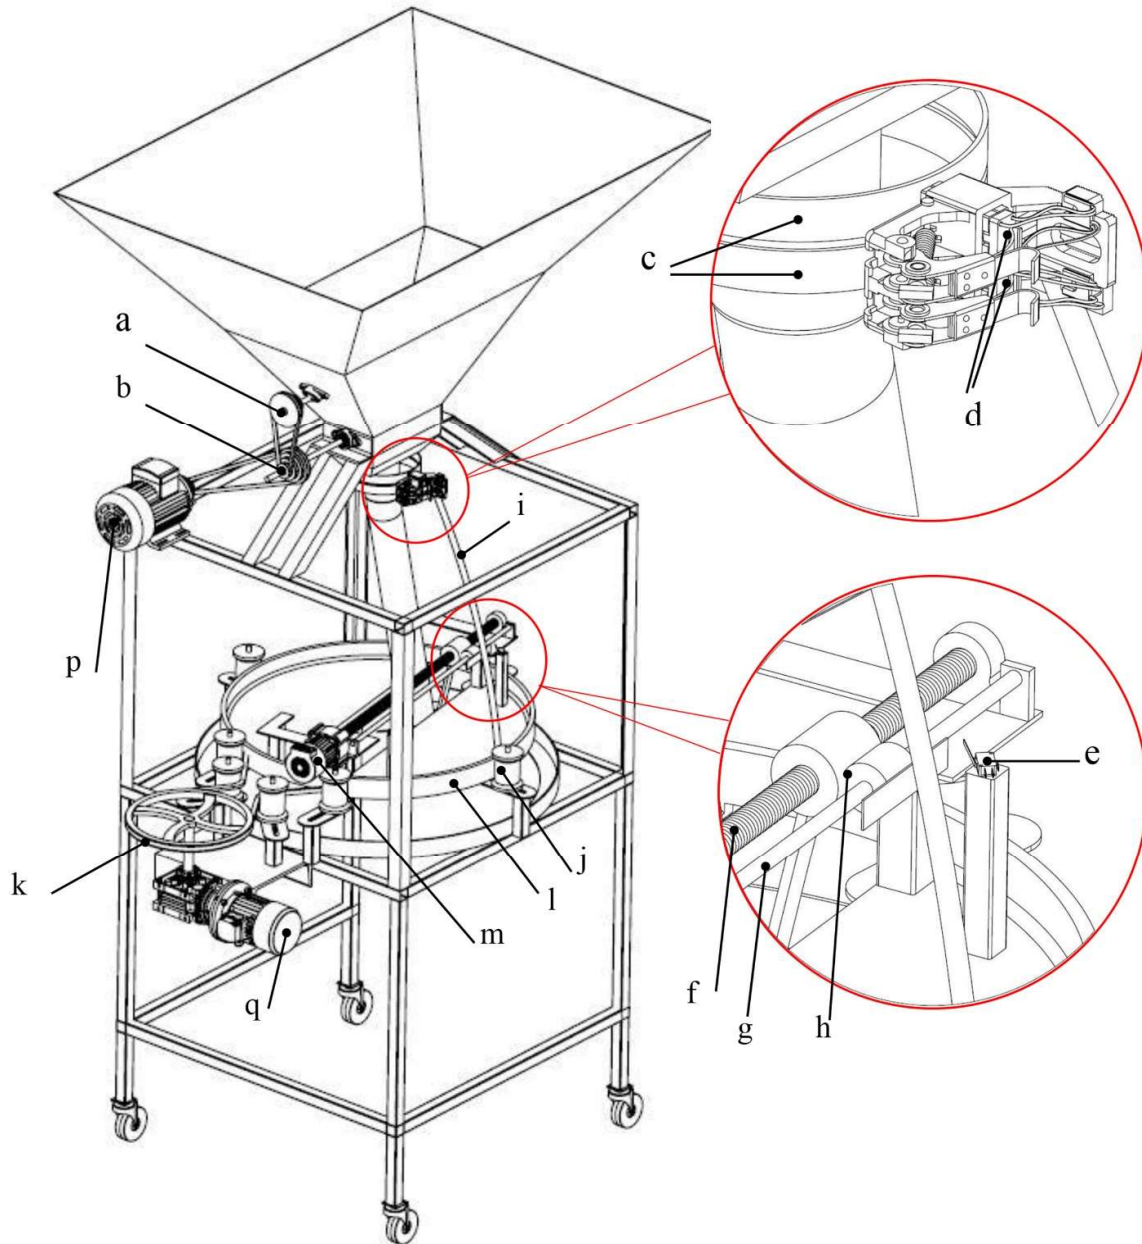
A Schematic of the main part of the experimental set up (a) the agitator shaft, (b) a fluted roller feeding shaft, (c) copper rings, (d) brushes, (e) a switch control, (f) the ball screw shaft, (g) a linear guide rail, (h) a slider, (i) a supporting rod, (j) a roller, (k) a pulley system, (l) a rotating rim, (m) a DC motor, (p) a three phase motor for driving the fluted roller mechanism, (q) a three phase motor for driving the pulley system.
